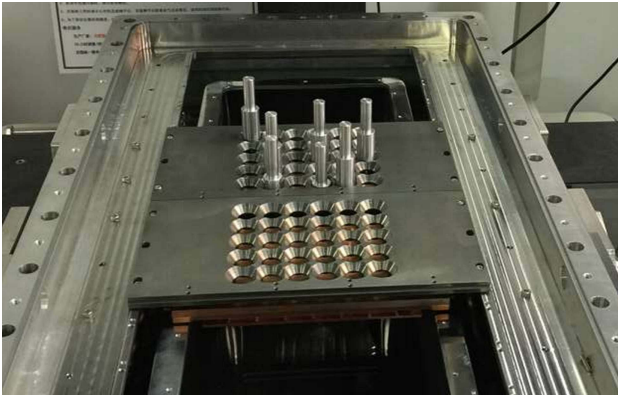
Trial assembly for the grids on the optical coordinate measuring machine.
